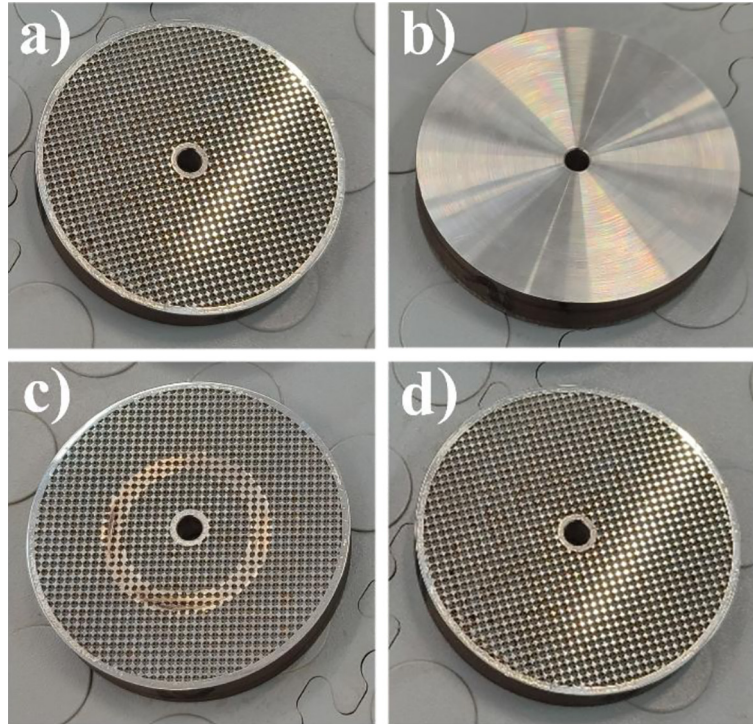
Tested workpieces: a) C-50, b) S-100, c) C-40, d) C-30
